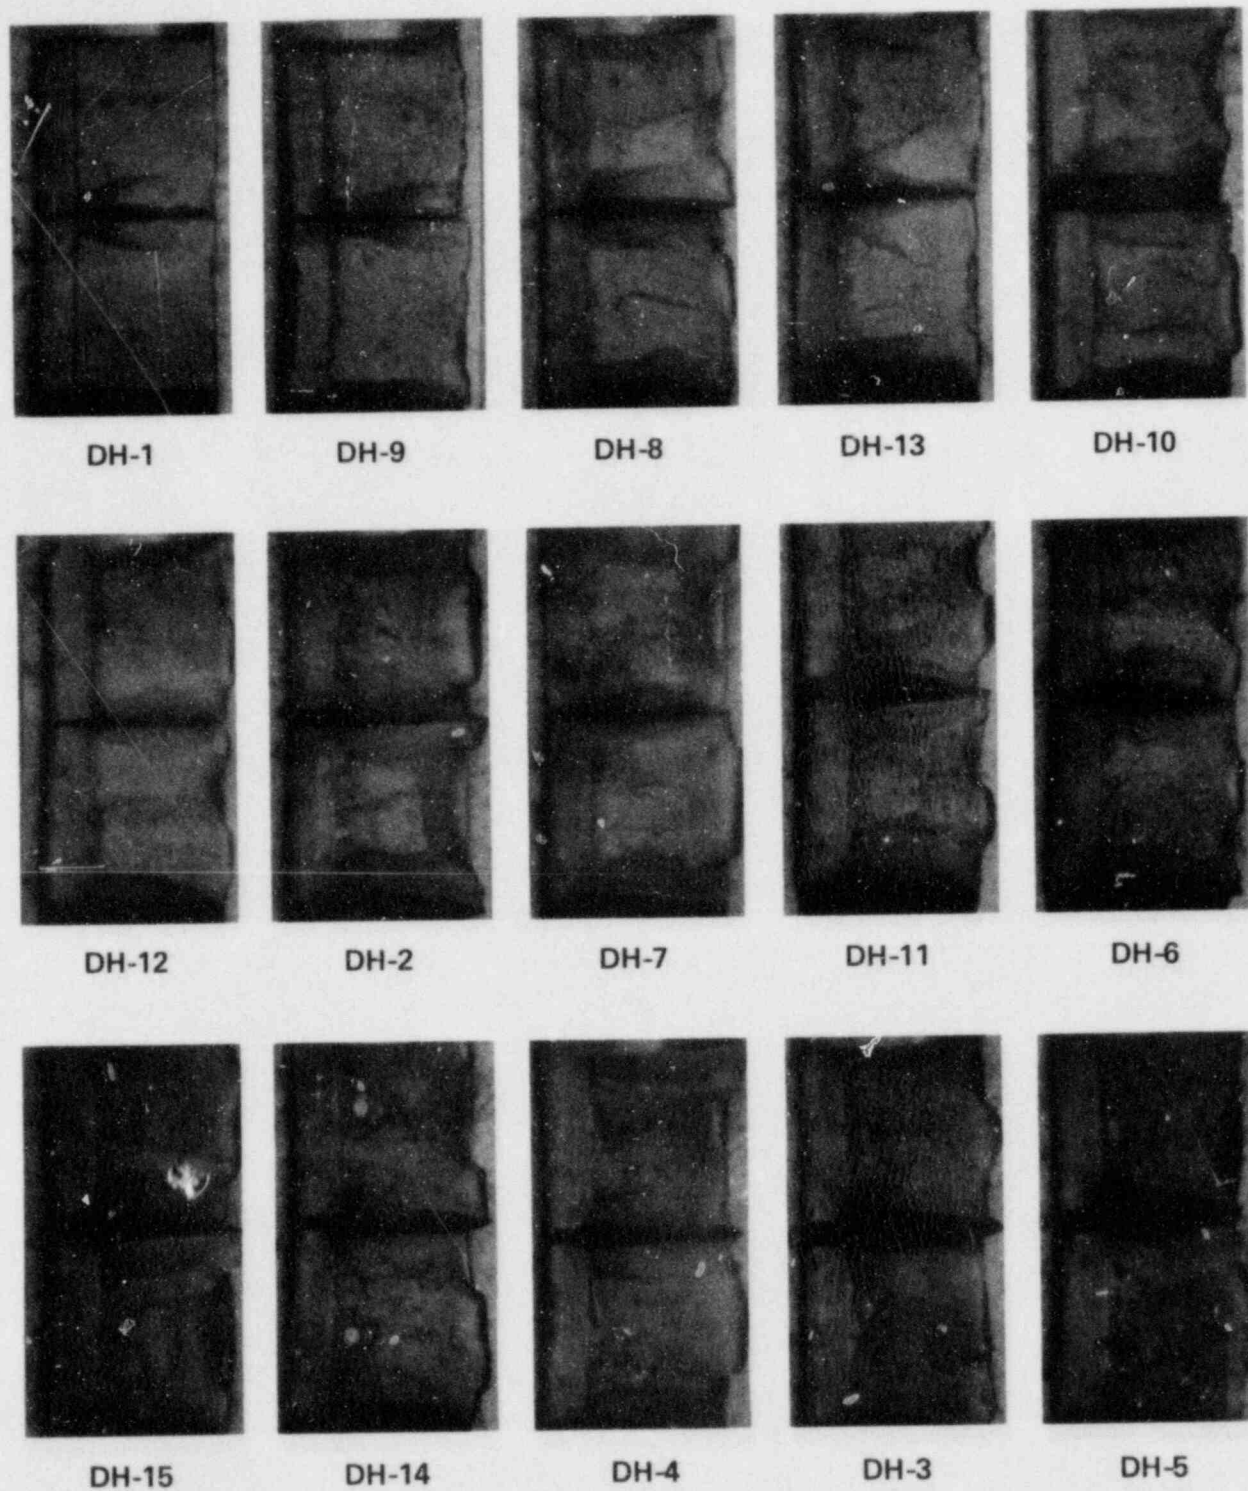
Charpy Impact Specimen Fracture Surfaces for McGuire Unit 1
